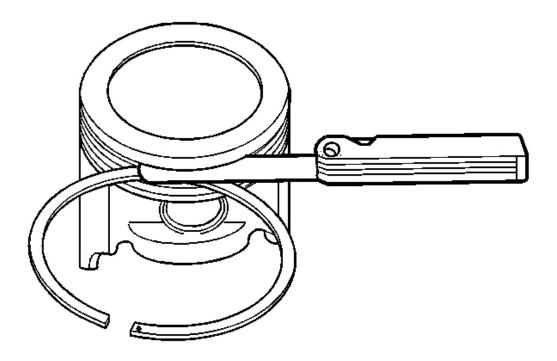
Measuring Piston Ring Side Clearance Courtesy of GENERAL MOTORS CORP.
